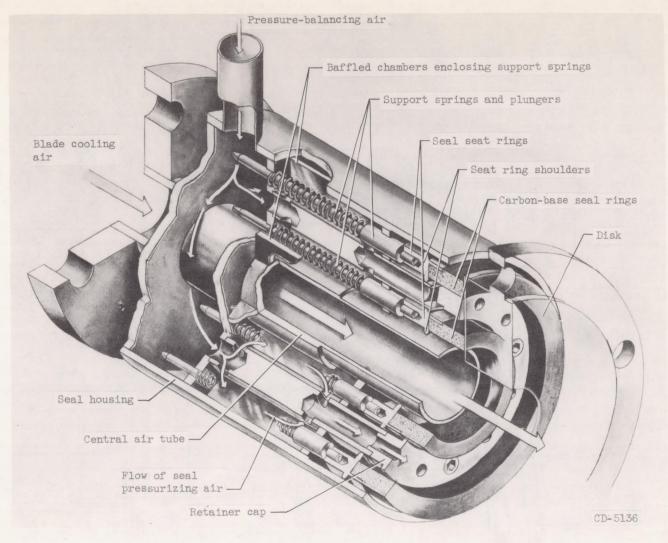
Cutaway drawing of balanced-pressure sliding seal.
